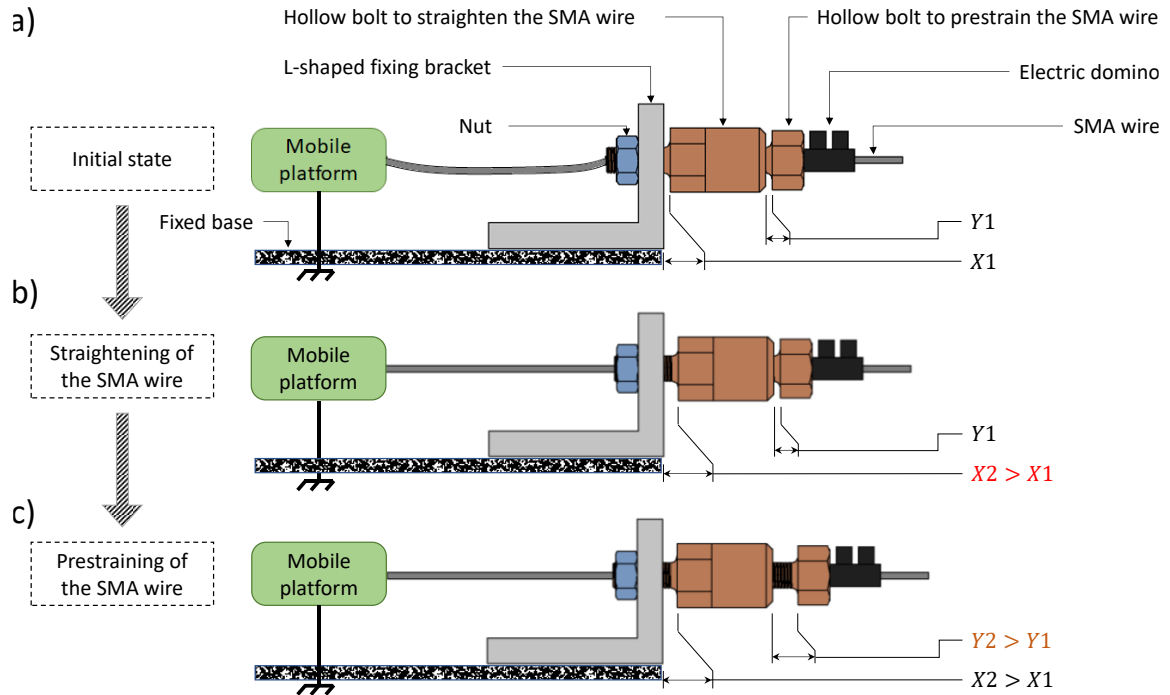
Principle of the prestaining system. (a) Initial state of SMA wire and hollow bolts. (b) Straightening the SMA wire by unscrewing the hollow bolt in contact with L-shape bracket. (c) Prestaining the SMA wire by unscrewing the hollow bolt in contact with the domino.
